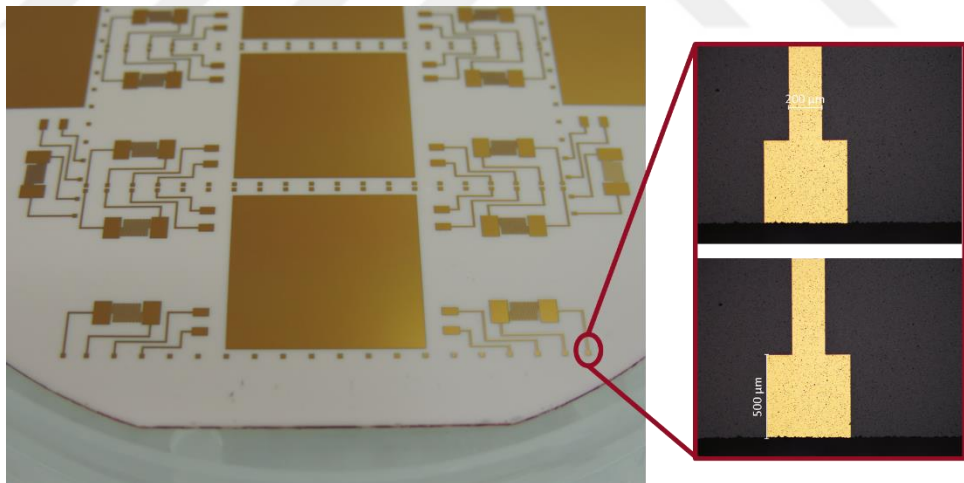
Close-up view of alumina substrate and microscope view of metal pads.
